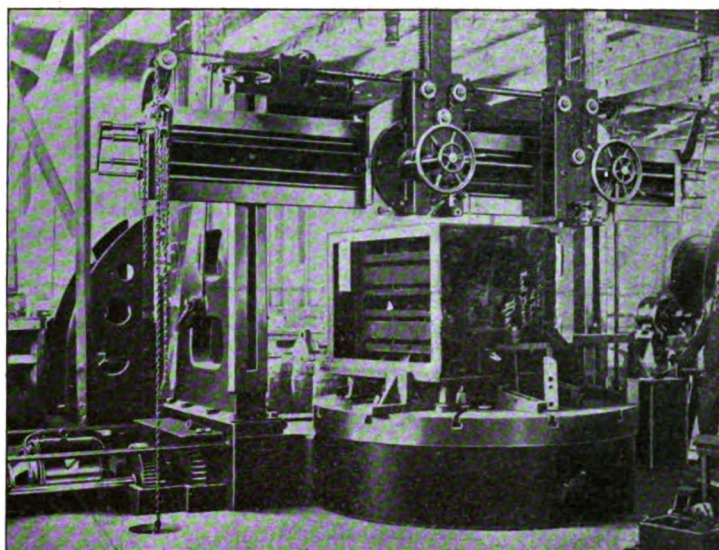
MOTOR-DRIVEN BORING MILLS.
